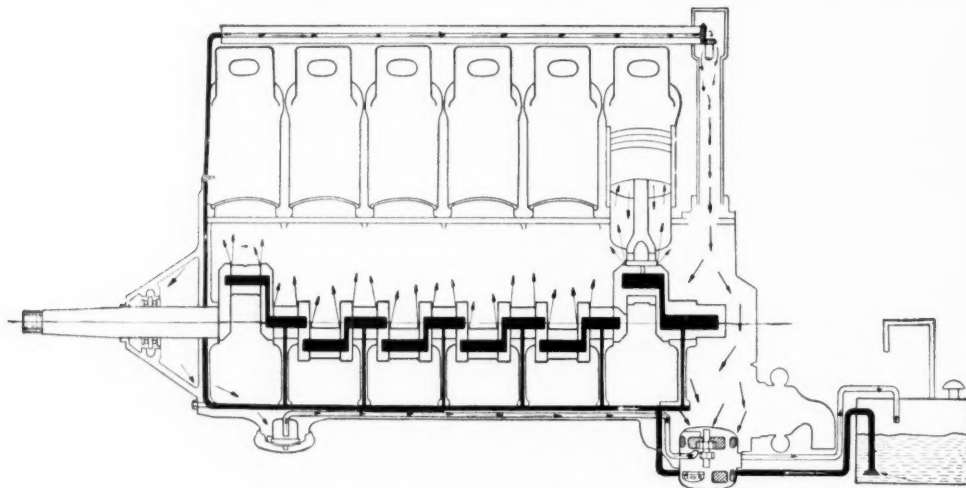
Lubricating system for the Liberty "12-A" engine. Path of oil is shown in heavy black outline with arrows to indicate direction.
